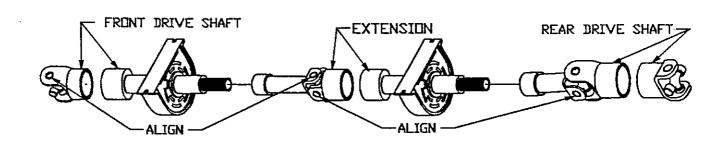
DRIVE SHAFT EXTENSION INSTALLATION
